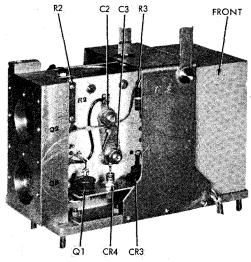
144 Volt (RMS), 400 cps Power Supply, Assembly 2A4, Test Points and Parts Location (Sheet 2 of 2)
